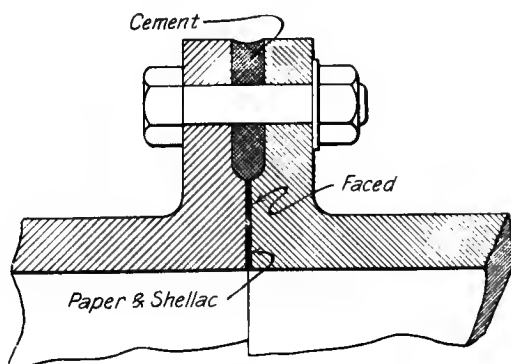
ANNULAR-FACED FLANGE JOINT.
